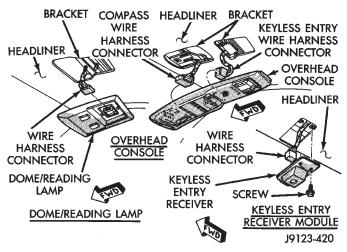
Dome/Reading Lamp/Overhead Console/ Keyless Entry Module
